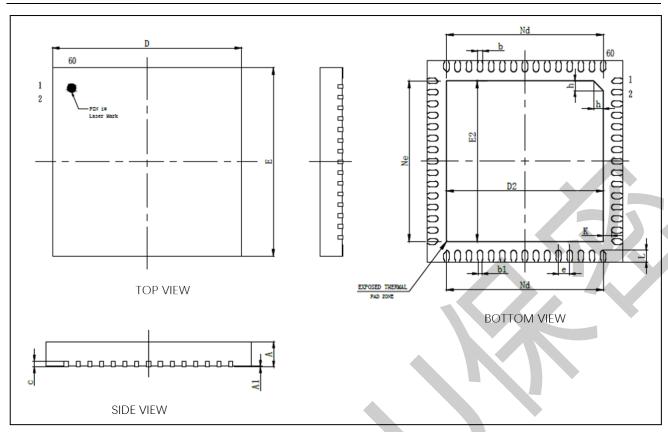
QFN60L 7 x 7 mm 60-pin package outline
